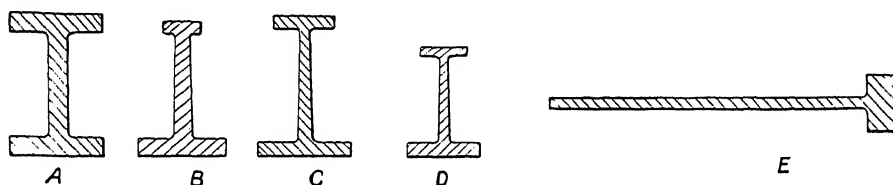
Illustrates the Camber of Castings produced by unequal Shrinkage
